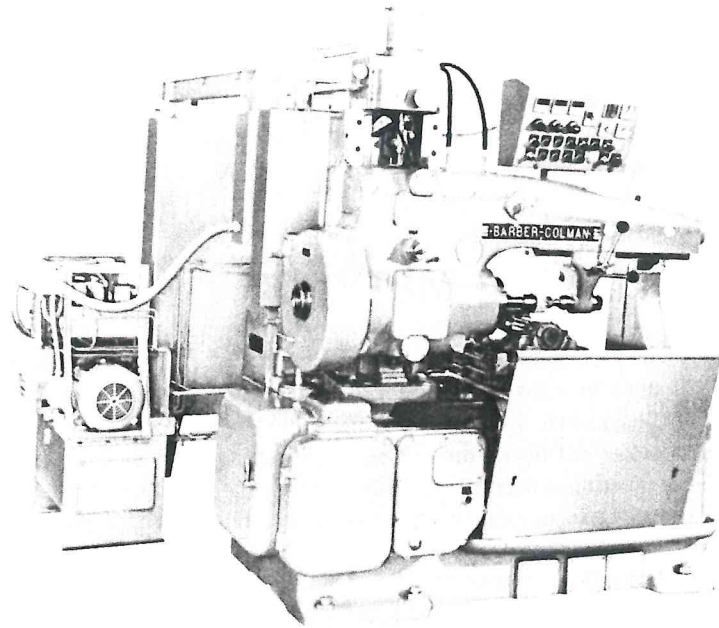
Hobbing machine. (Courtesy of Barber Colman Corporation, Rockford, Ill.)
